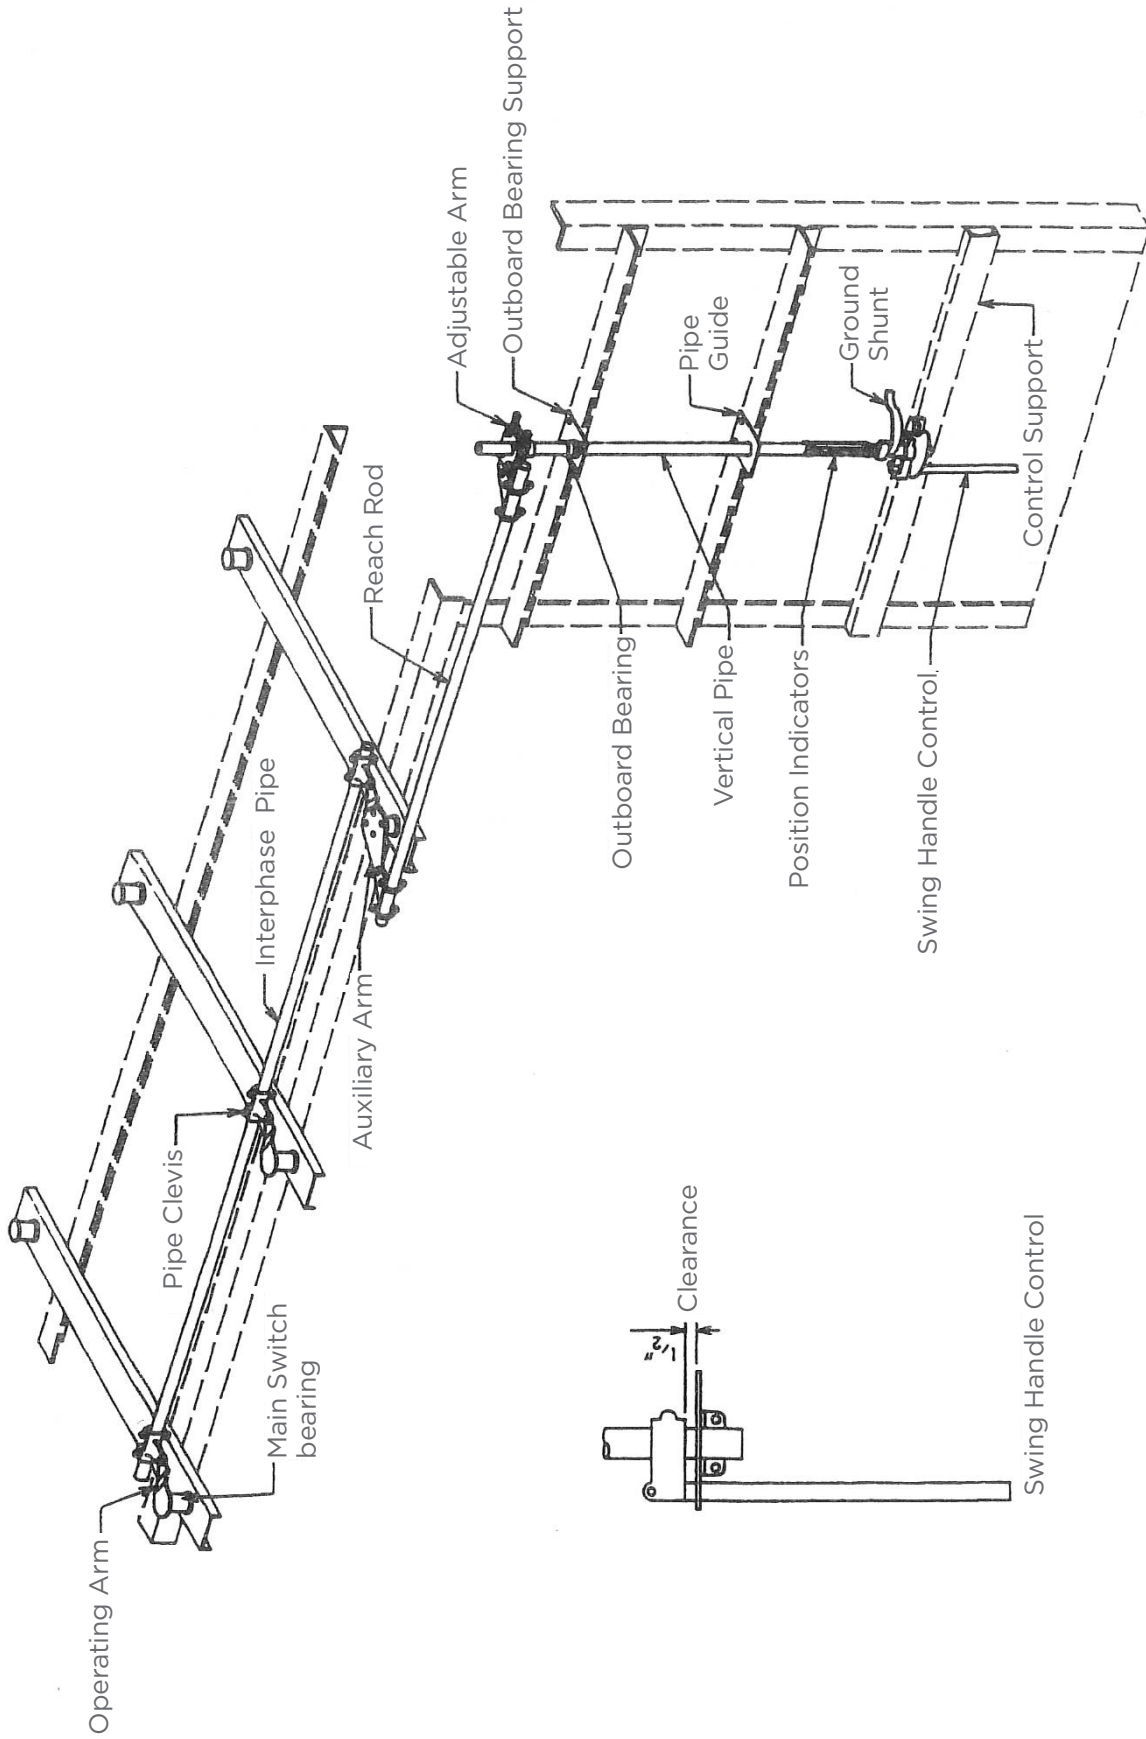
TYPICAL CONTROL ASSEMBLY
